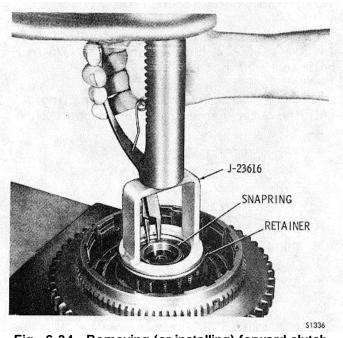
Removing (or installing) forward clutch spring retainer snapring
